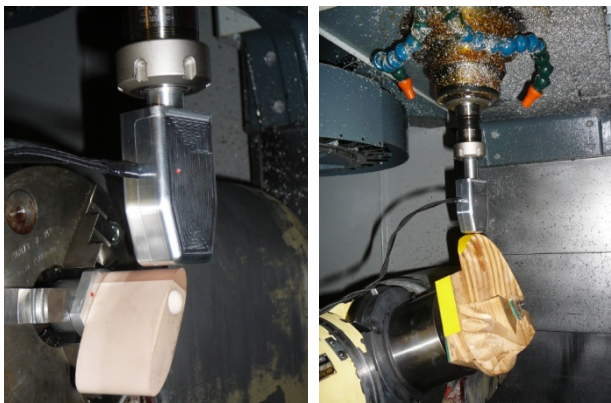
Testing toolpaths for multi-axis machining (left – four-axis, right – five-axis)
